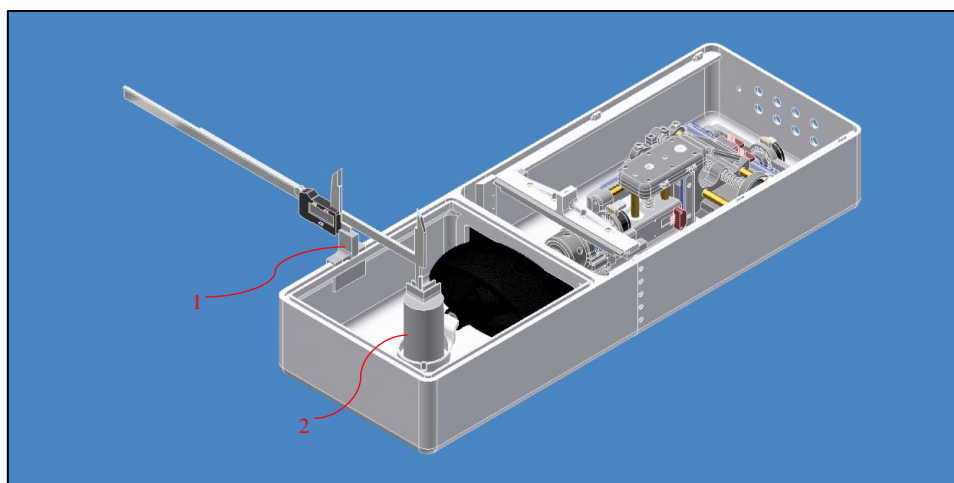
CAD drawing of the set-up that was used to estimate the accuracy of the Y-axis motion.
